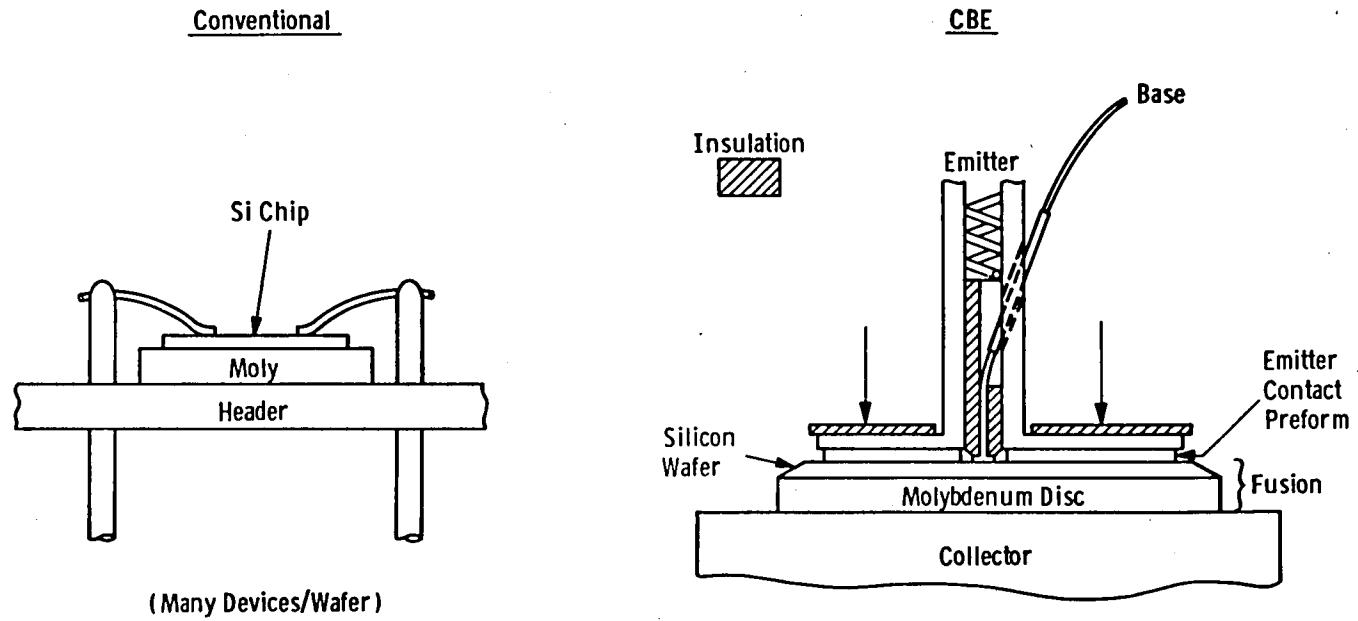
Cross-sections showing conventional and CBE assembly techniques. The external package (not shown) provides the compressive force indicated by the arrows.
